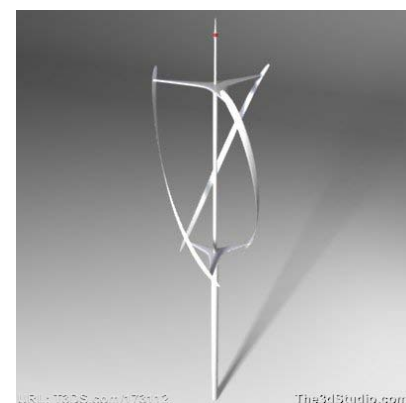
(g) 3D Auto CAD view of the helical wind turbine
